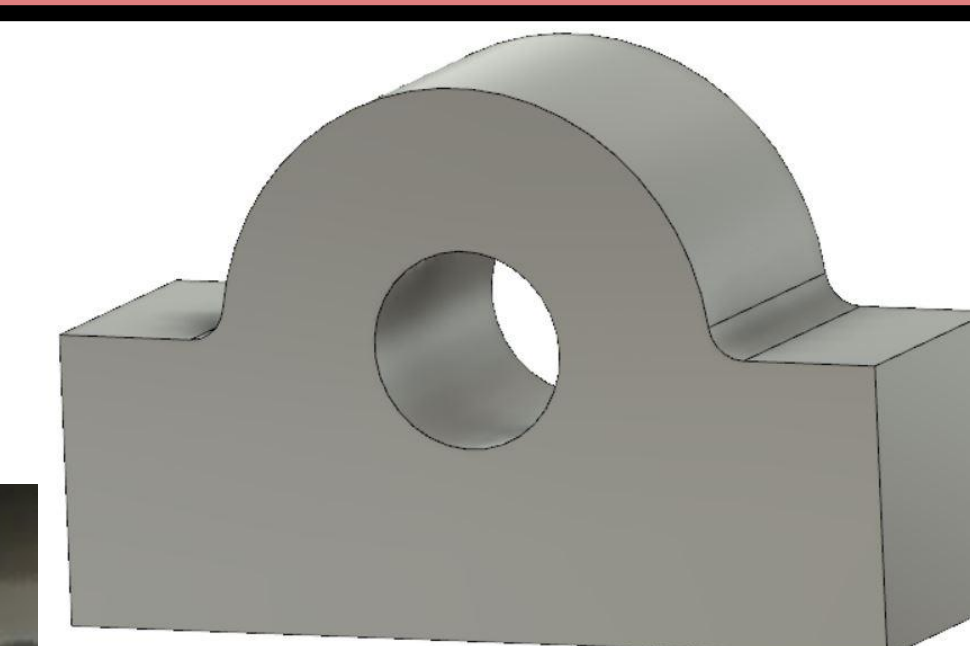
CAD part for fuel injector mount. The mount for the fuel injector was machined at BU Engineering Product Innovation Center.
